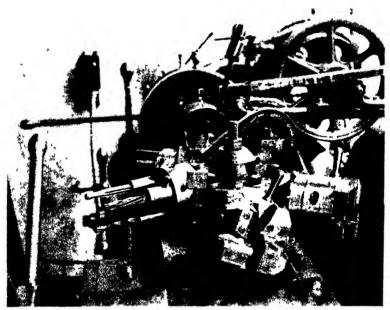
This is how a gun-right factory speeded the drilling operation on a turret lathe
